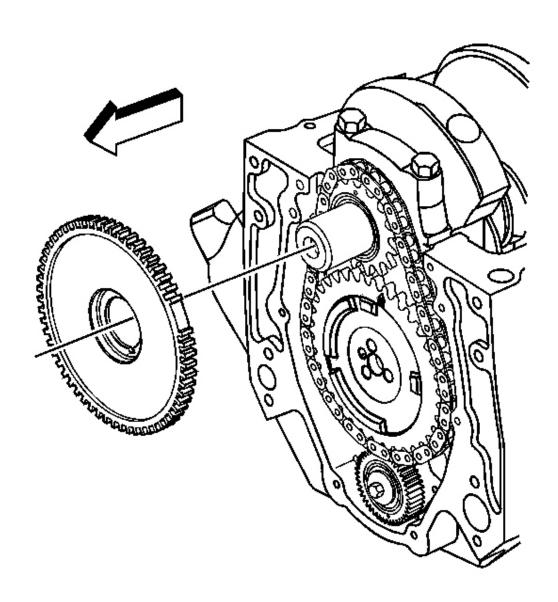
View Of Crankshaft Position Sensor Reluctor Ring Courtesy of GENERAL MOTORS CORP.
